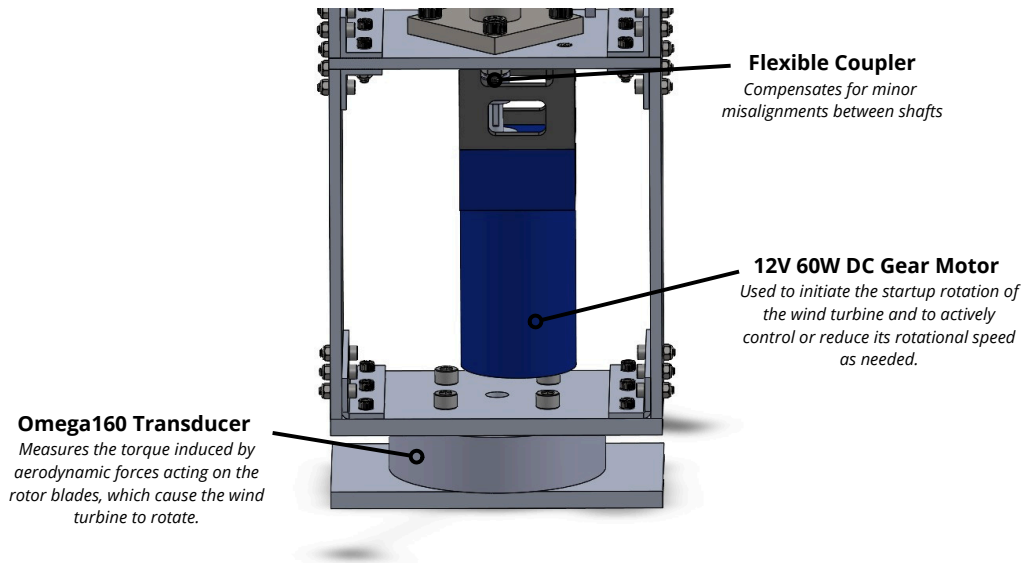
Detail view highlighting the torque sensor, first platform, motor, and flexible coupler. These components provide the structural base, torque measurement, and rotational connection for the turbine setup.
